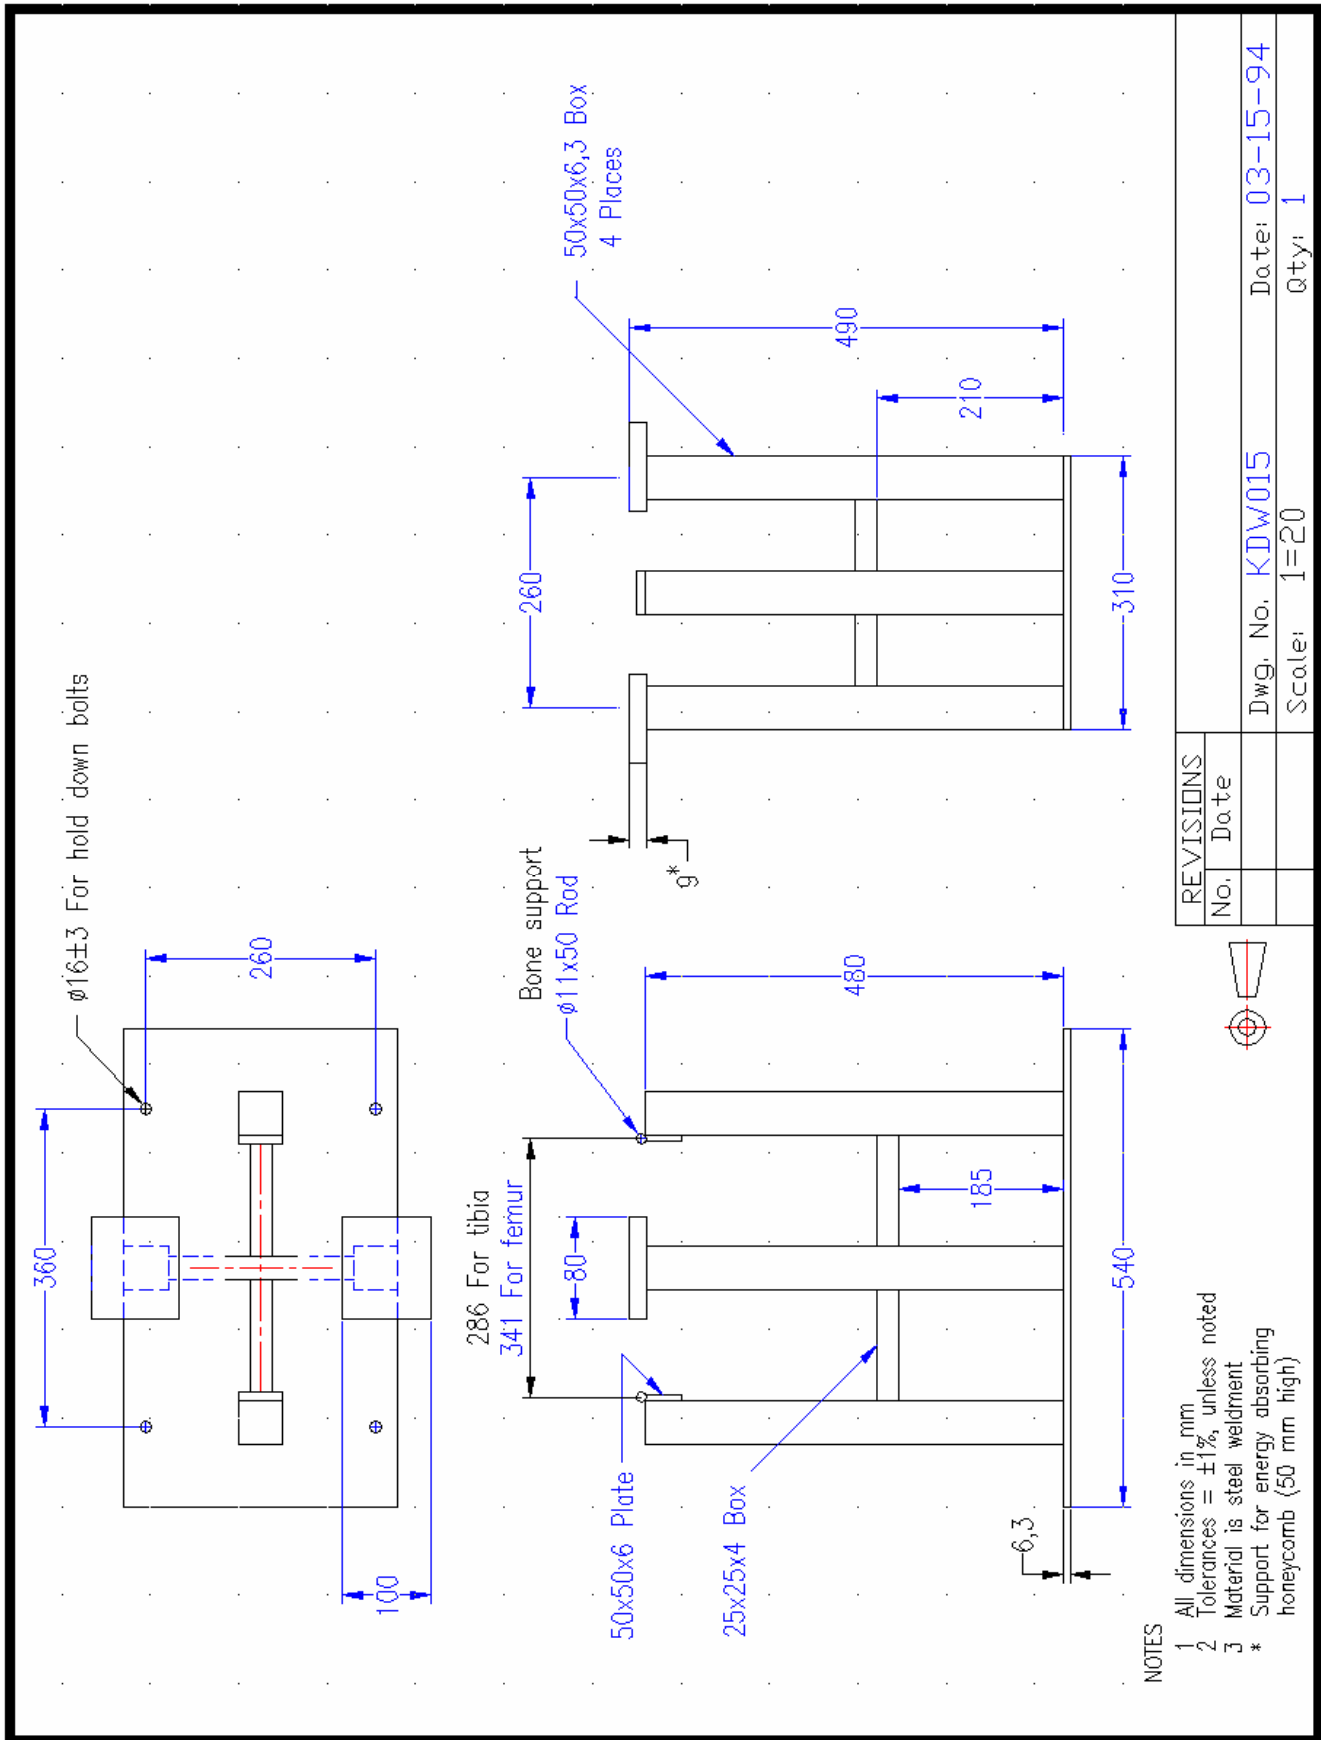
Specimen supports for the bone dynamic bending fracture test
